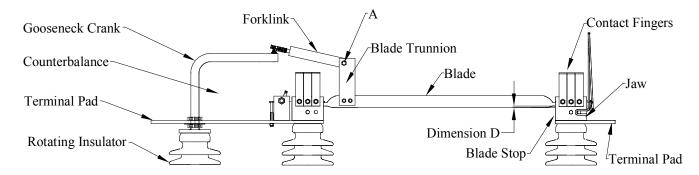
TYPICAL SET OF CURRENT CARRYING PARTS
